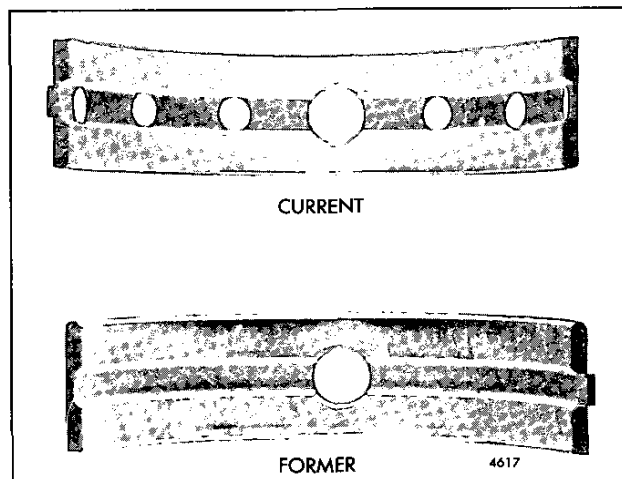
Old and New Upper Main Bearing Shells (V-Type Engines)
